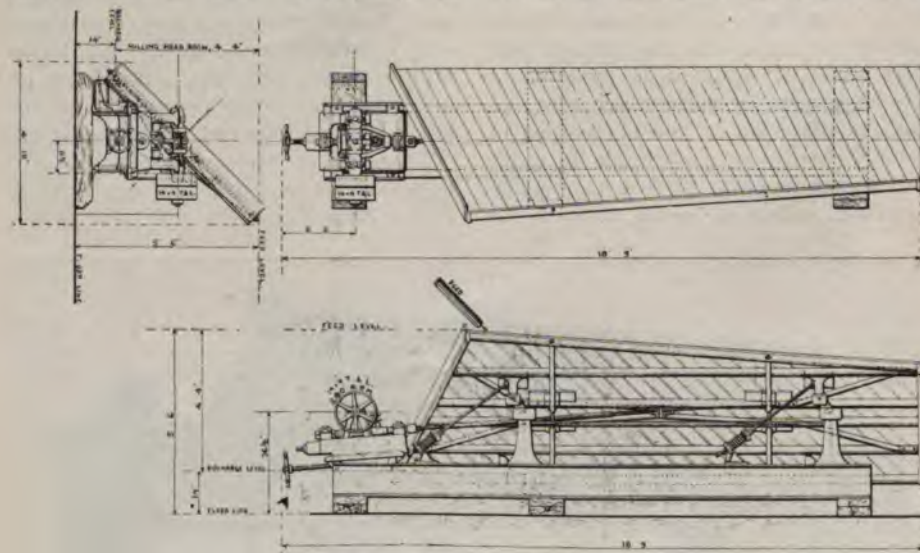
Showing Rear Elevation, Horizontal Plan and Cross-Section.
